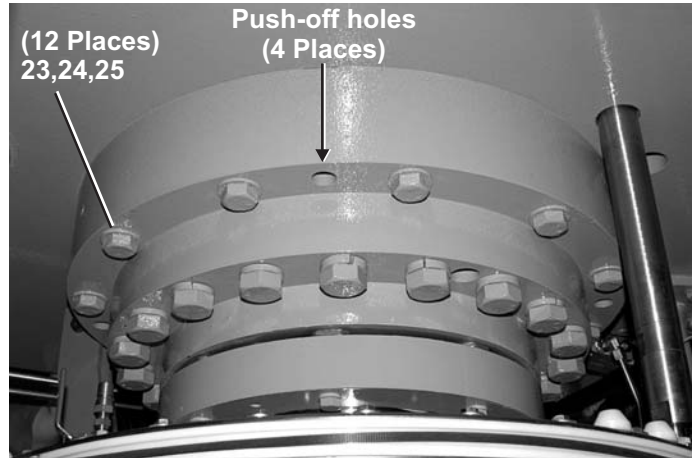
Hydraulic Ram to Upper Press Weldment
